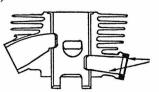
Area of cylinder to be modified to match internal diameter with larger carburetors.
